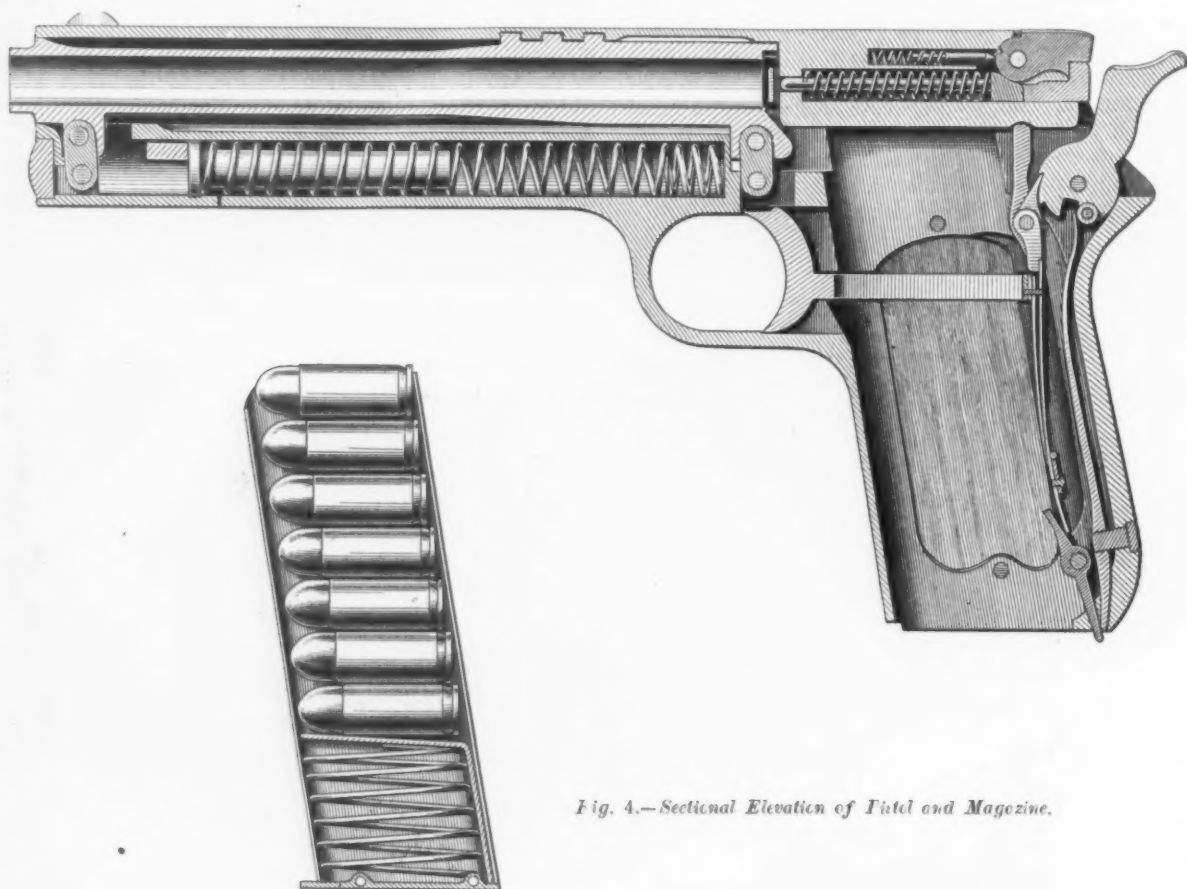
Sectional Elevation of Pistol and Magazine.
